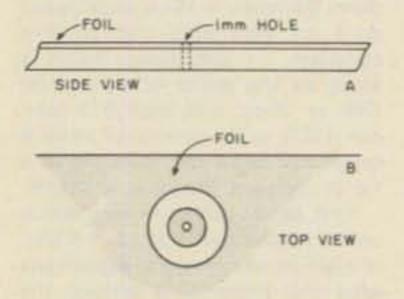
A 1 mm hole is drilled in the board where a component lead is to be placed (a), and then the isolated pad is formed with a special tool (b).
